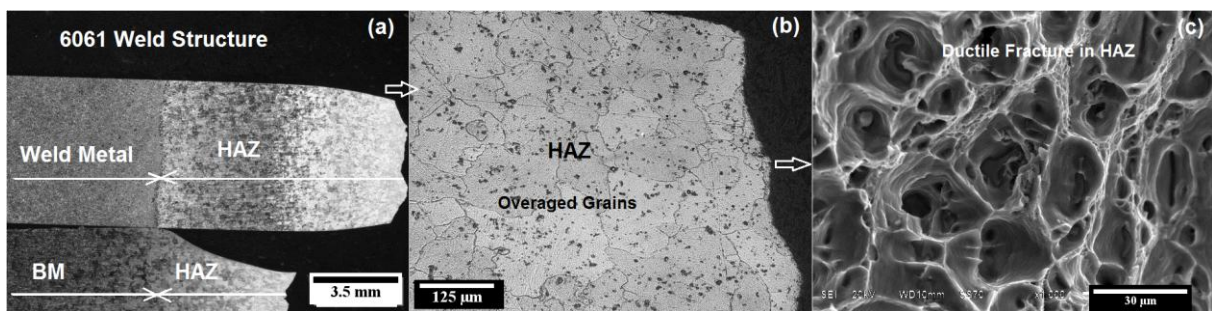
Typical tensile fracture surfaces of 6061-T651 welds displaying ductile failure in the heat-affected zone (a) typical fracture location; (b) ductile fracture in the HAZ and; (c) ductile fracture surface in the HAZ of 6061.
